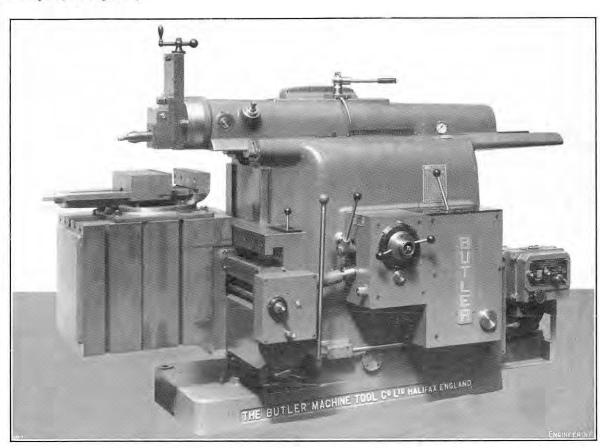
Prototype 26-in, Shaper; Butler Machine Tool Co., Ltd.
